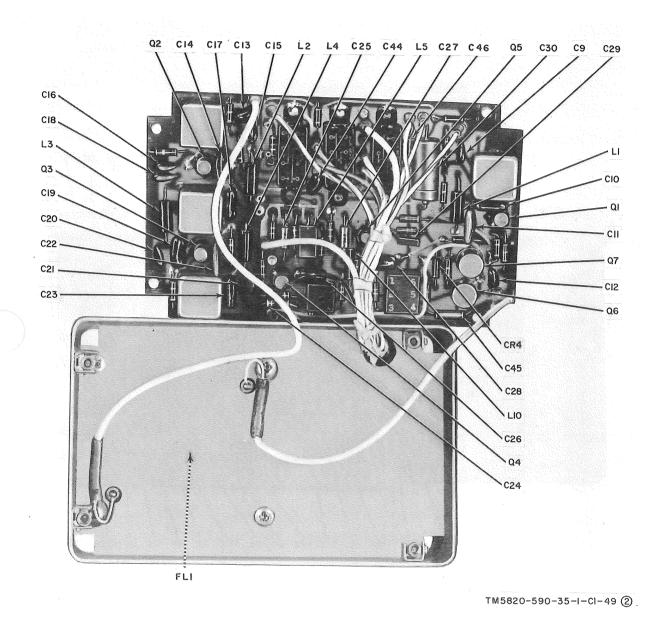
IF Audio module, rear view, component boards removed (part 2 of 2).
